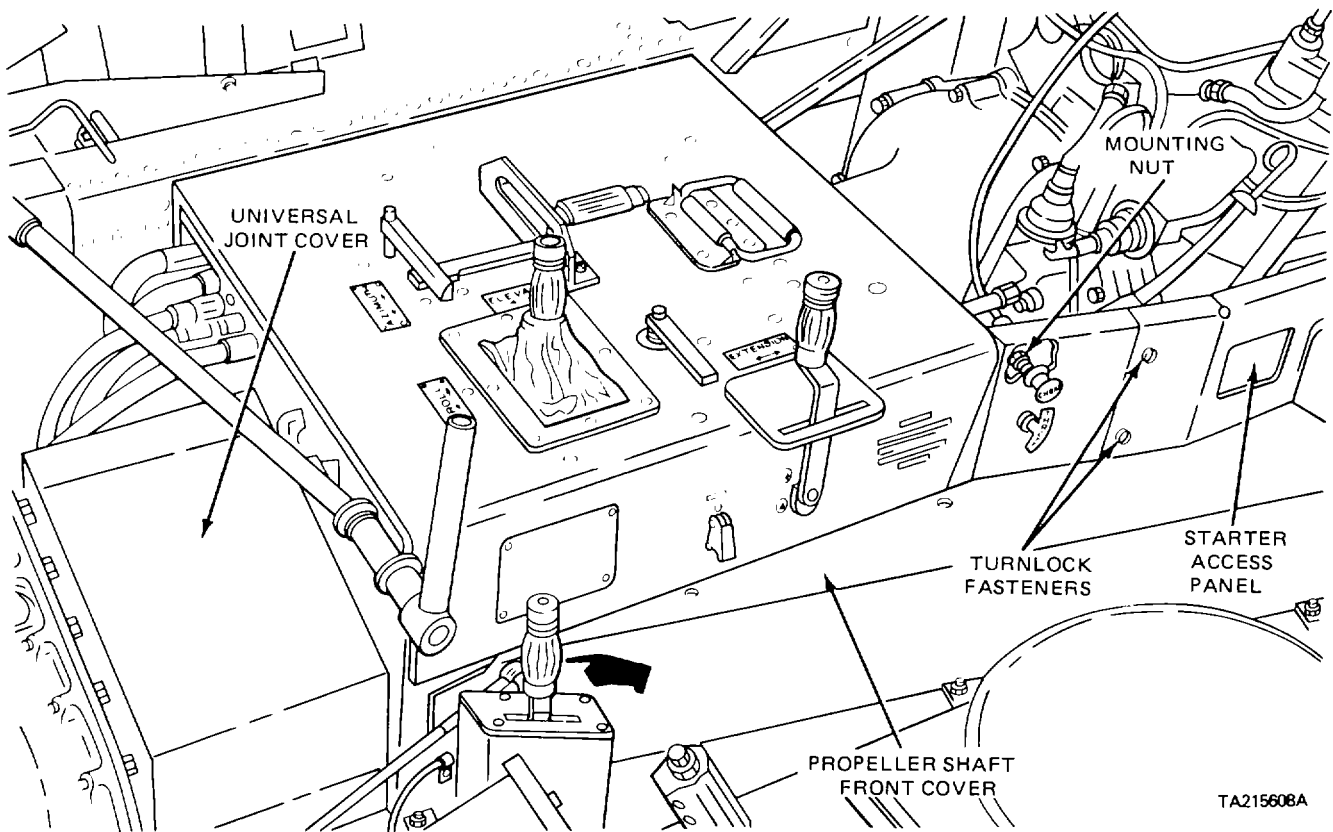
Engine and Transmission Replacement - Starter Switch Access Panel Removal
